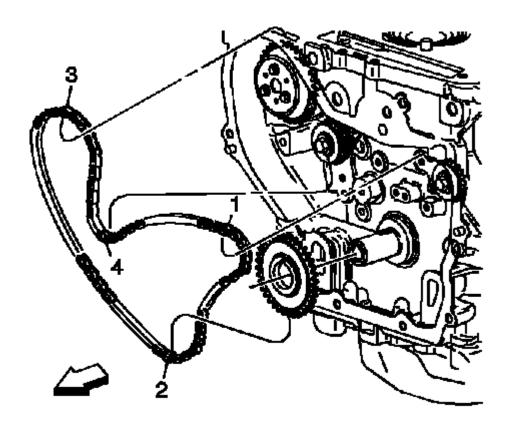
Balance Shaft Drive Chain Routing And Aligning Courtesy of GENERAL MOTORS COMPANY
